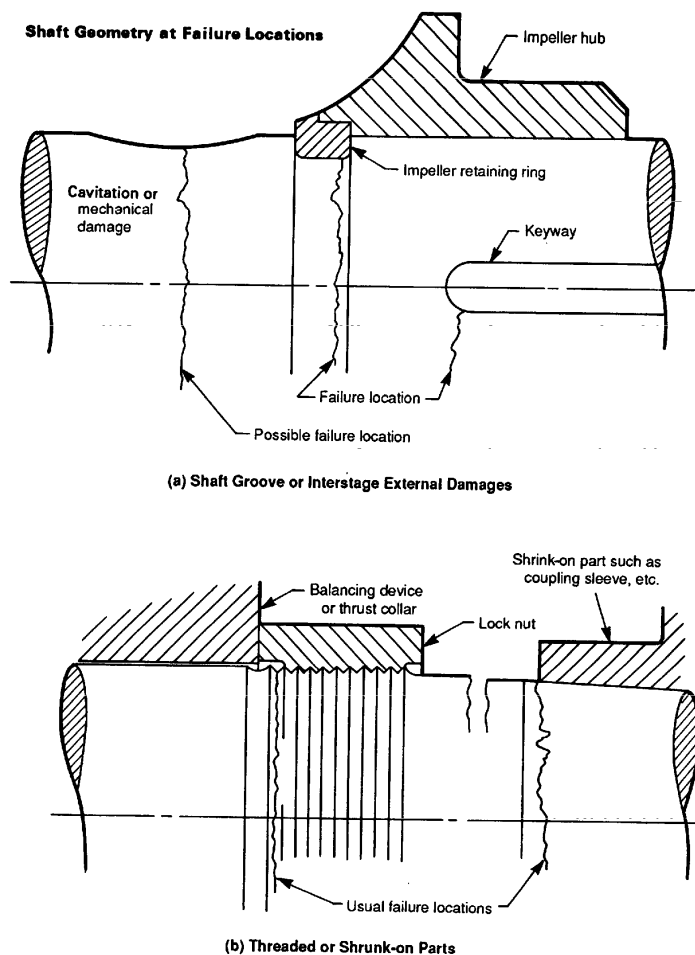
TYPICAL CENTRIFUGAL PUMP SHAFT FAILURE LOCATIONS
